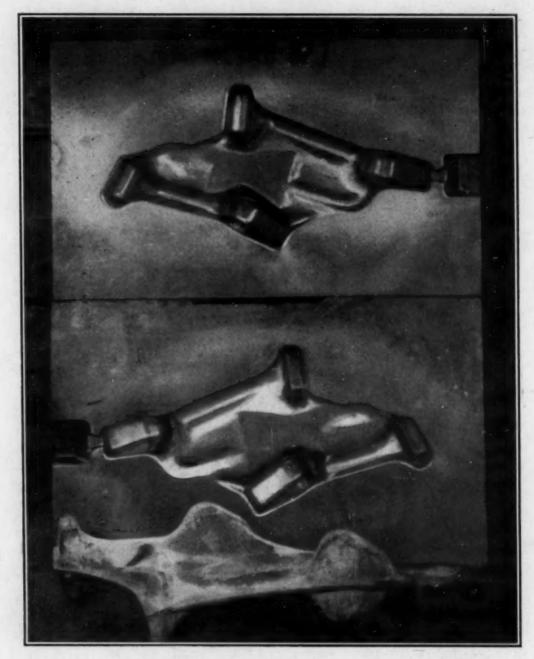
Preliminary Blocking Dies for Part Shown in Fig. 6.
